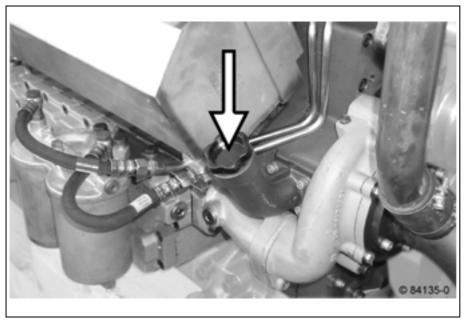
Lube oil filling nozzle (depending on the installation position of the engine, the lube oil filling nozzle is on the side with easier access)
